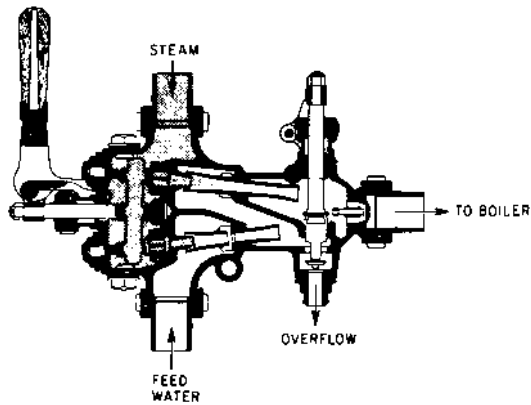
Boiler injector, starting position (Schutte and Koerting)
